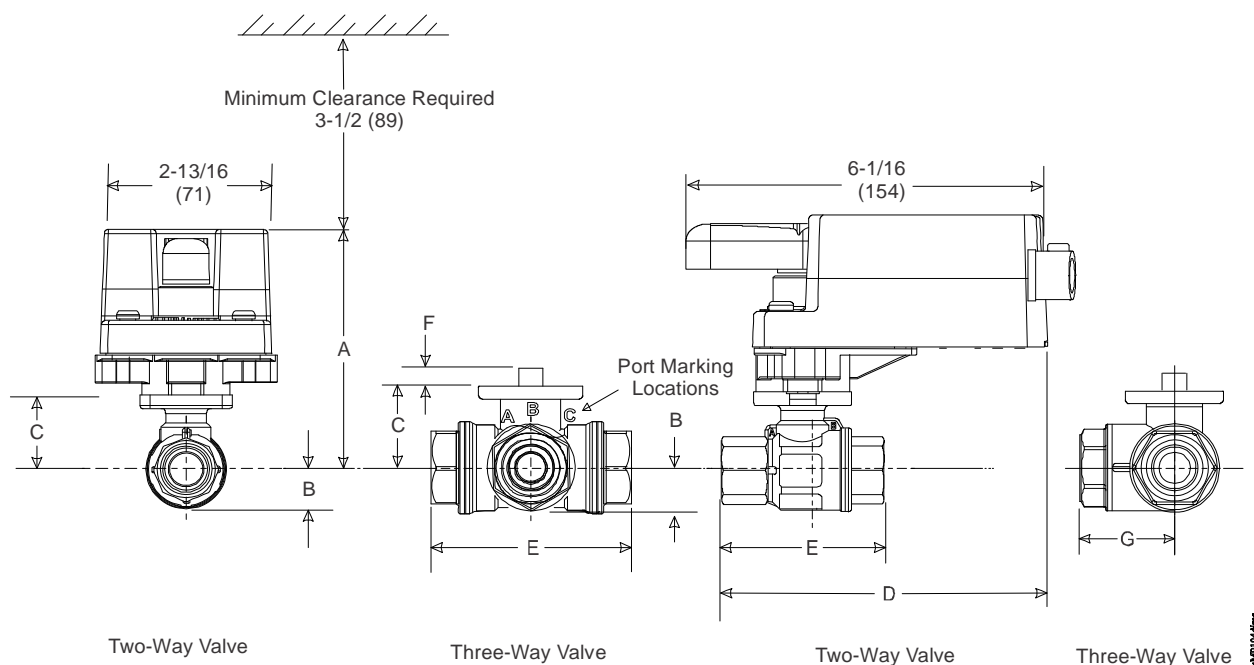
VA9104 Series Electric Non-Spring Return Valve Actuator Dimensions, in. (mm)
